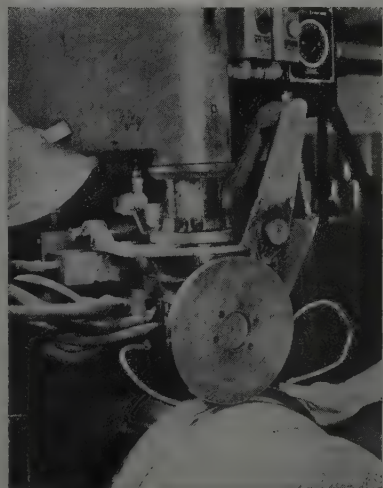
Welding cross-over tubes to flame tubes by atomic-hydrogen process. Photos in both Fig. 1 and 2 were taken at ITE Circuit Breaker Co., sub-contractor fabricator
